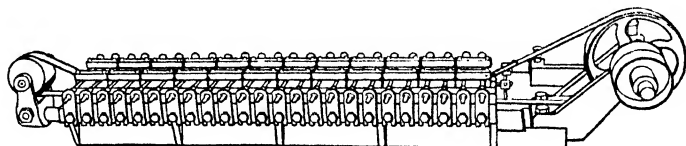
Multiple drilling machine driven by an endless belt (see also Fig. 78, p. 112)
